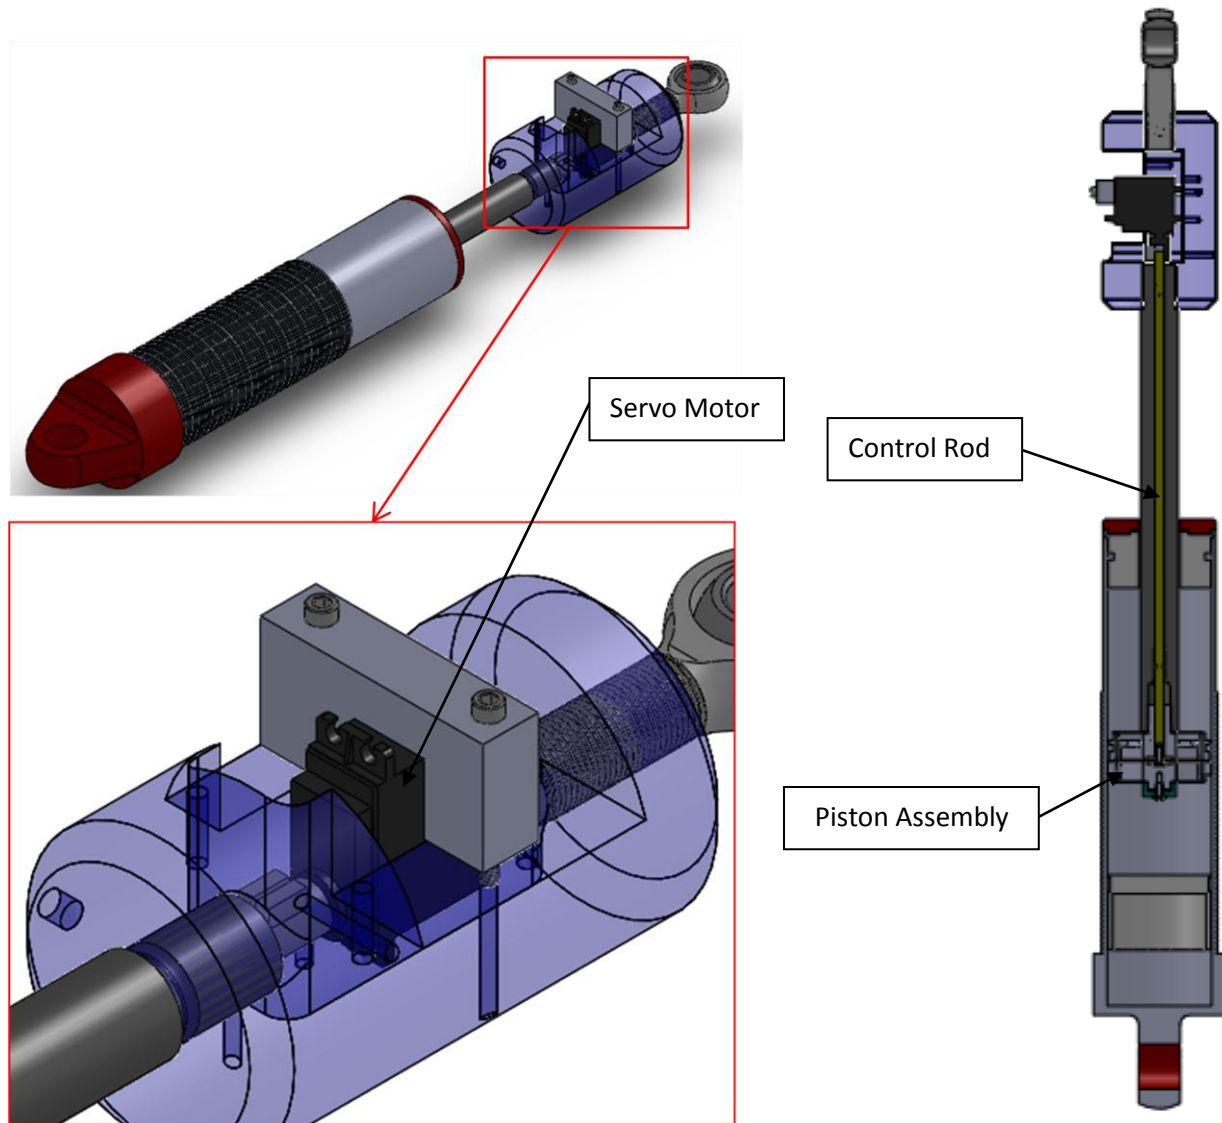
Final Prototype Damper, isometric, iso-close, and section views
